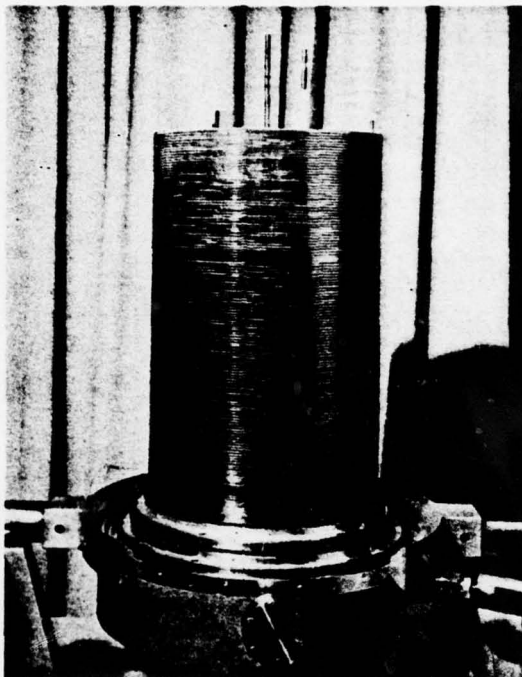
C-Field Coil Mounted on Clock Assembly
